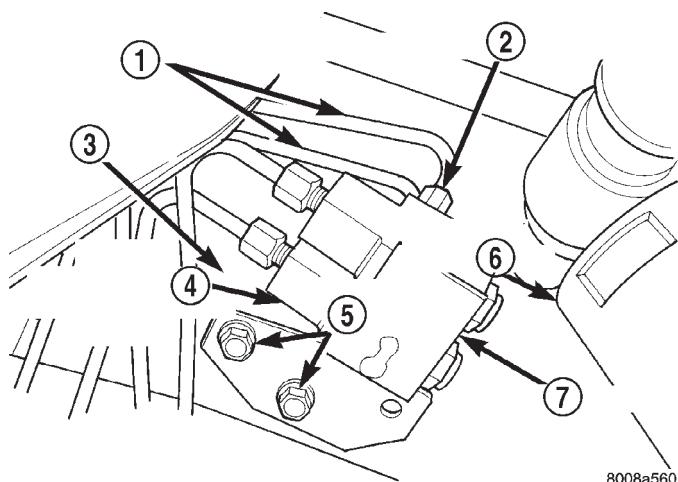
Rear Brake Proportioning Valve And Brake Tube Locations
